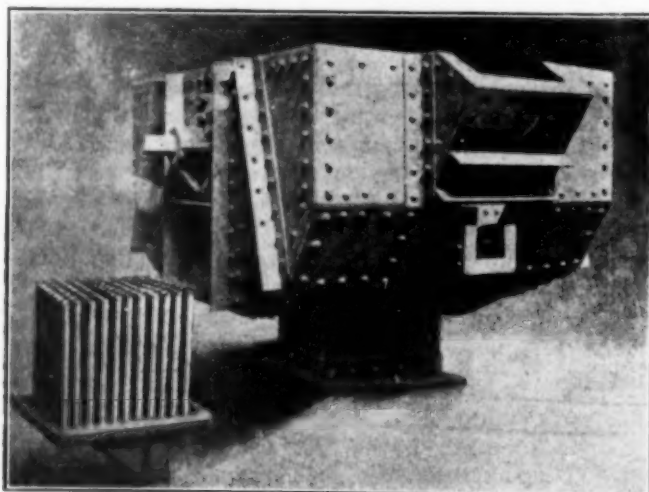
FURNACE SHELL, CONDUCTING BOTTOM SHOWN SEPARATELY ON LEFT
